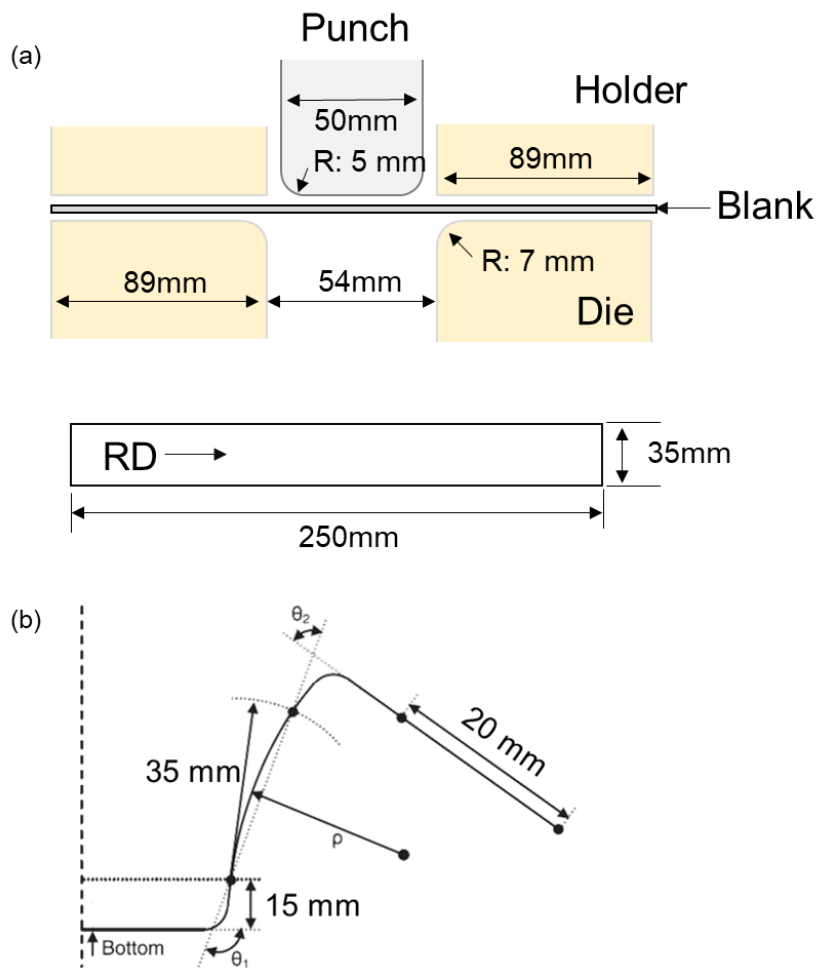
(a) Dimensions of the tools specimen geometry, and (b) springback parameters for the U-draw bending tests.
